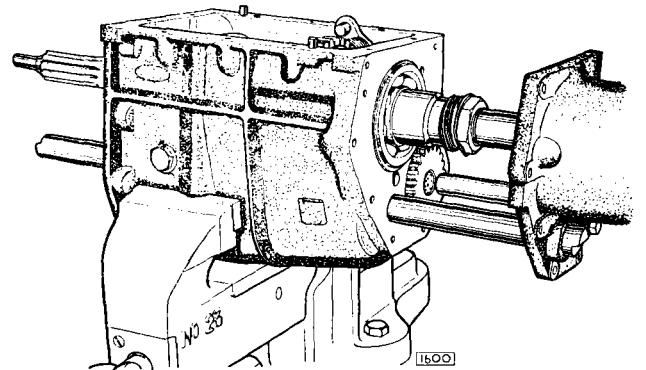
Showing the removal of the extension; note the dummy countershaft inserted at the front end of the casing.
